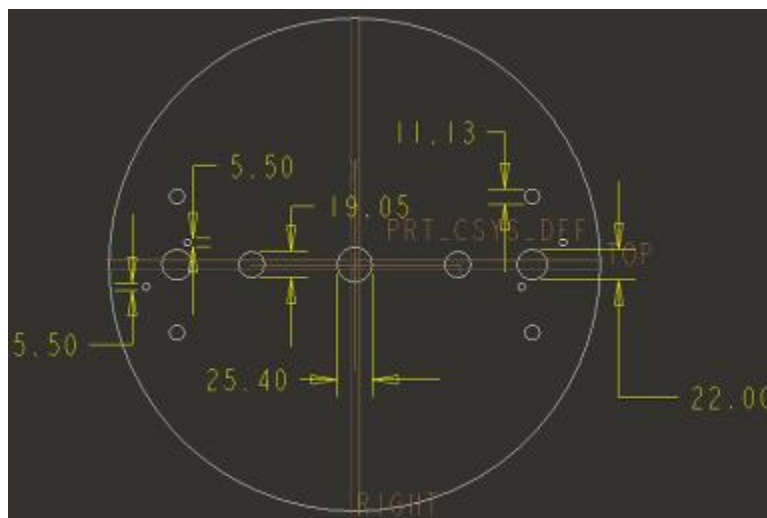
CAD of super bracket hole diameters (all dimensions in mm)
